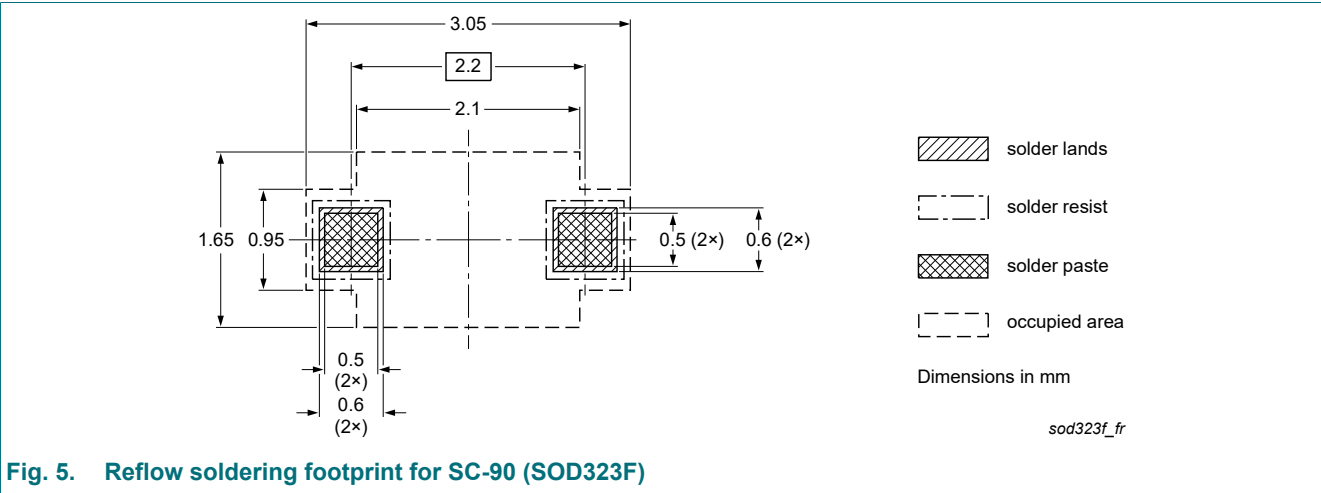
Reflow soldering footprint for SC-90 (SOD323F)
